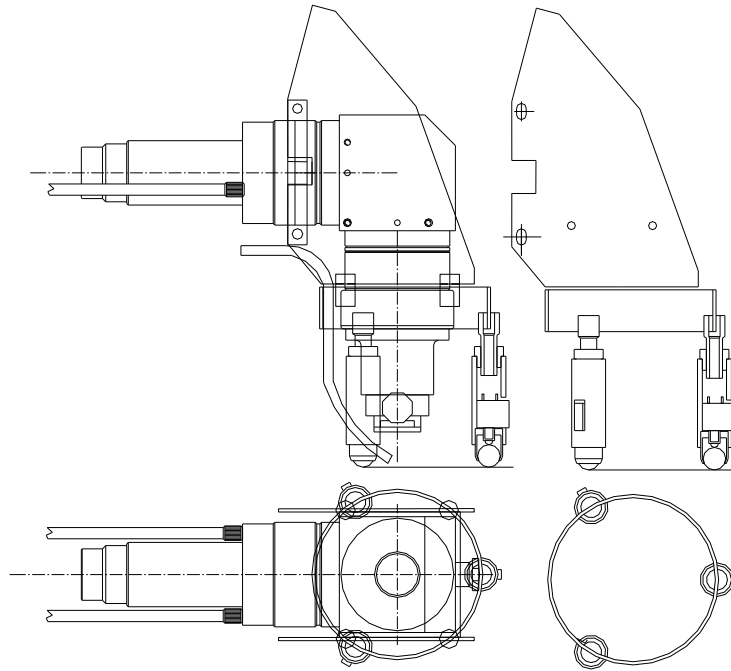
The layout of the handheld laser tool with support on three spring-loaded ball bearings, securing a more precise positioning of the hand tool in a position, perpendicular to the workpiece during welding, despite small irregularities of the surface of the workpiece.
